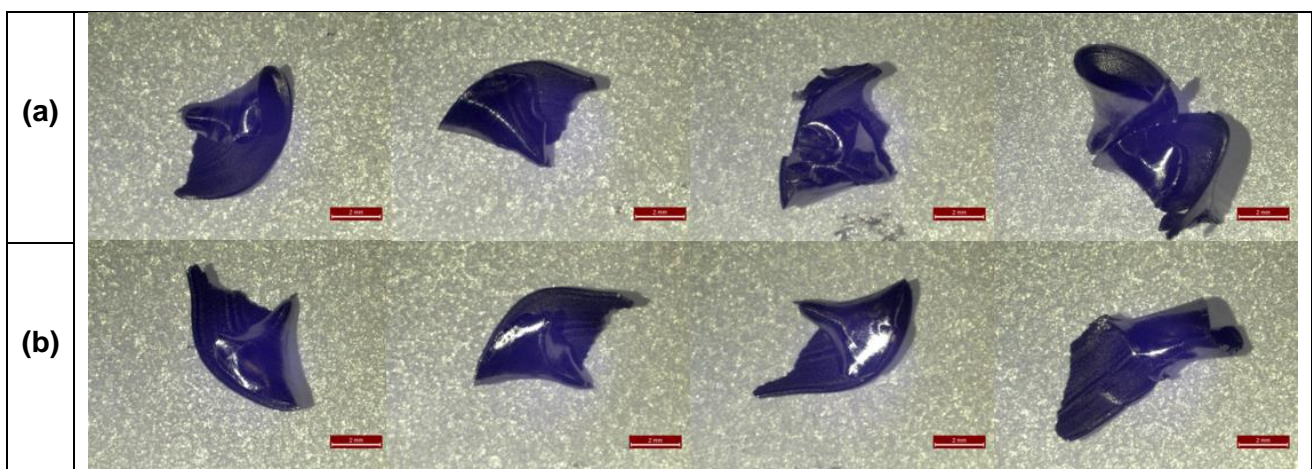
Various chips obtained from INCO1 D 2FL 16 9 drilling Inconel 718 - (a) chips collected after the first drilled hole, (b) chips collected after the final drilled hole
